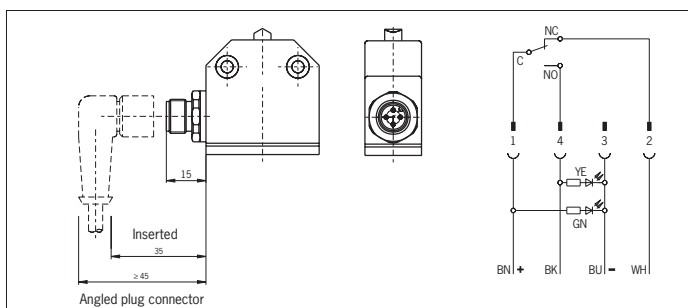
Dimension drawing/connection diagram NO1.550C1526 with plug connector M12 (4-pin)
